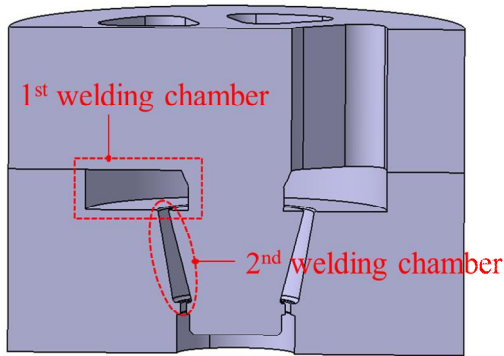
Proposed new welding chamber porthole extrusion die
